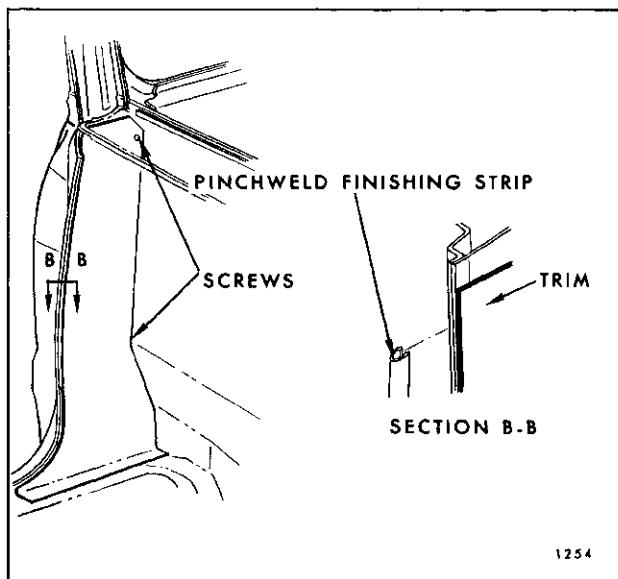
Rear Quarter Trim Assembly - "A-80" Styles
